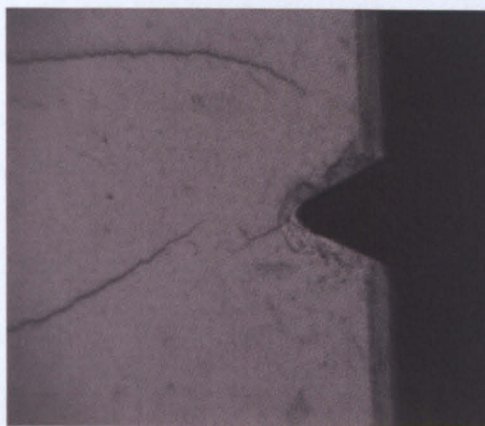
Magnified image of the cracked notched dry specimen of coating 'B', showing coating damage around the machined notch
